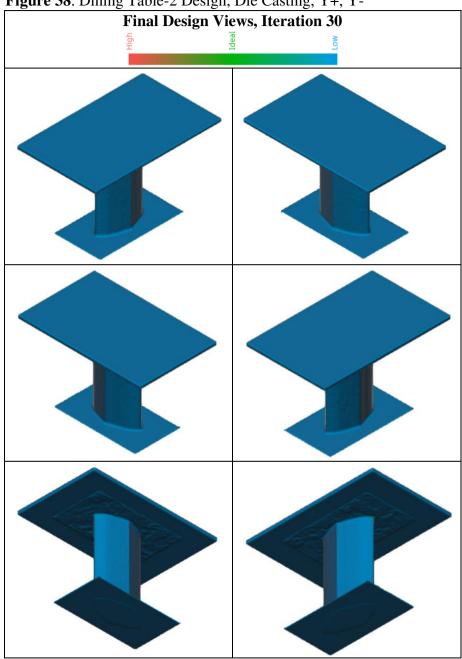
Dining Table-2 Design, Die Casting, Y+, Y-
